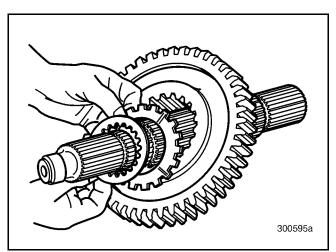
Installing External- and Internal-Toothed Thrust Washers
